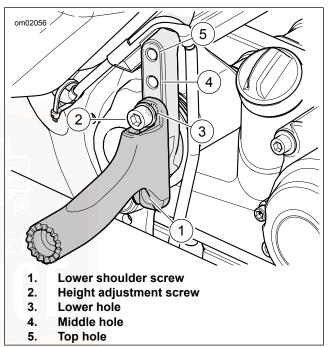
Footboard Height Adjustment (rotating arm and footboard removed)
